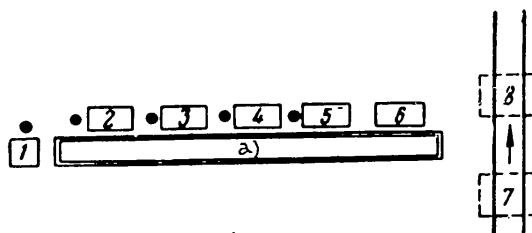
Schematic Outline of Assembly-Line Production of a Wing Rib
